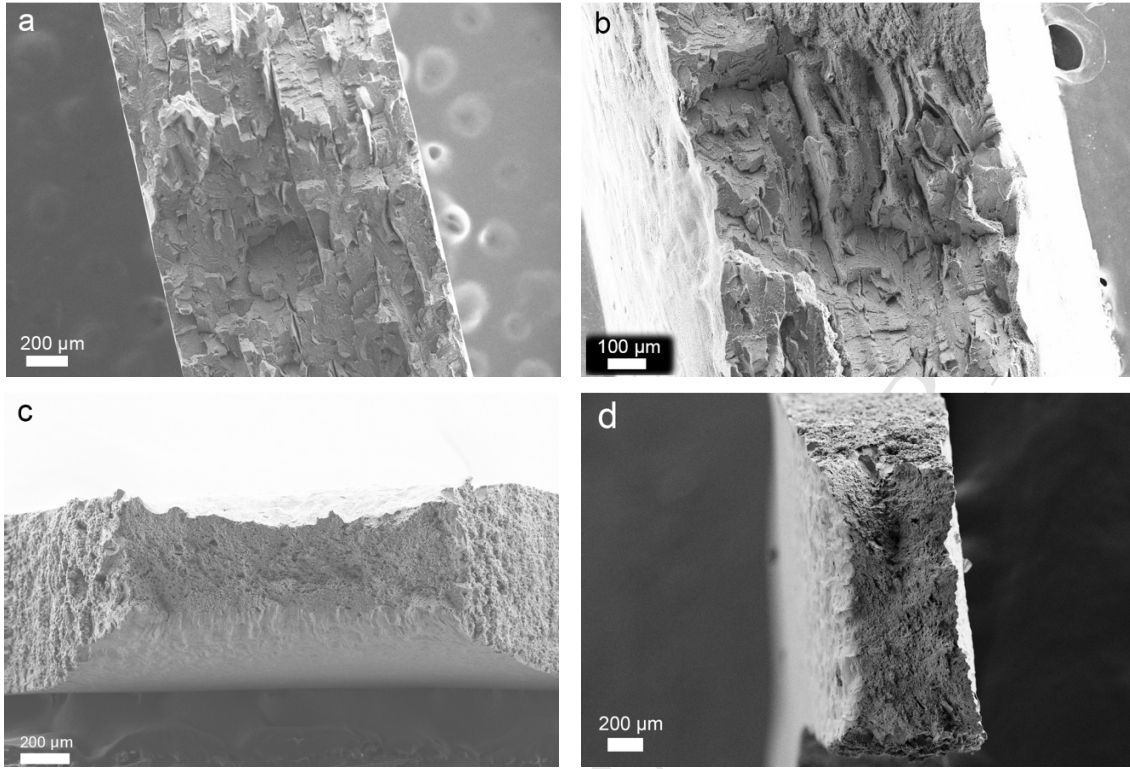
Secondary electron (SE) SEM images of fracture surfaces of the full-length tensile specimens for a) the base material and b) the FSWed APMT™. SE images of the mini-tensile tested specimens of the c) SZ in the transverse direction, and d) mini tensile testing of the SZ in the longitudinal direction.
